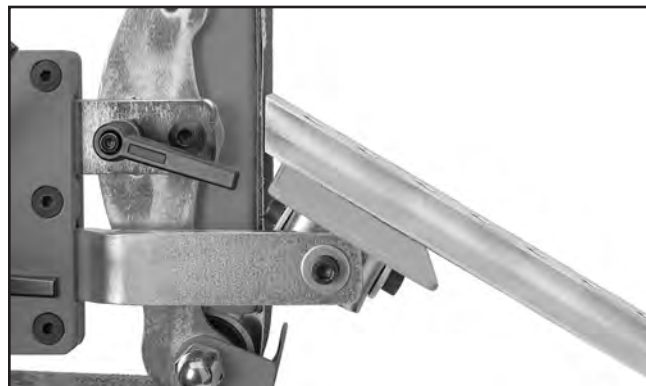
Example of tool rest swivel adjusted for workpiece angle.
